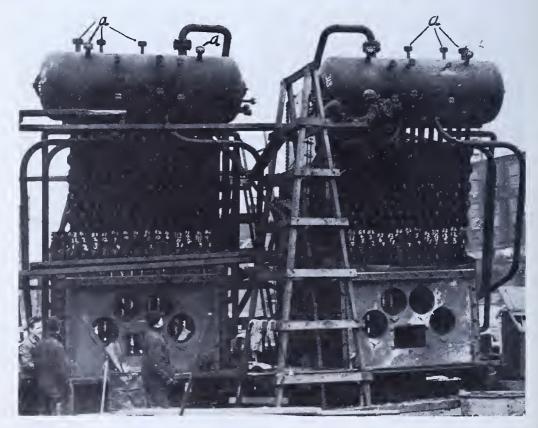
Boilers Ready for Preliminary Hydrostatic Test; all Tubes and Saturated Steam Line in Position. Note Use of Blanks (a) Instead of Boiler Mountings
